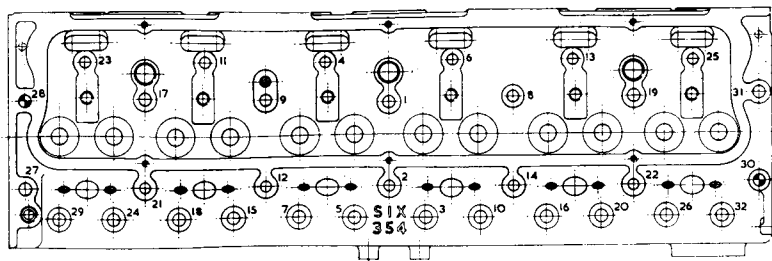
Tightening Sequences for Cylinder Head Nuts and/or Setscrews.
